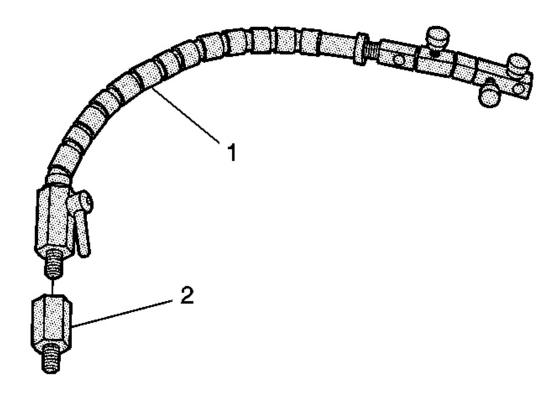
View Of Adapter & Swivel Base Courtesy of GENERAL MOTORS CORP.
